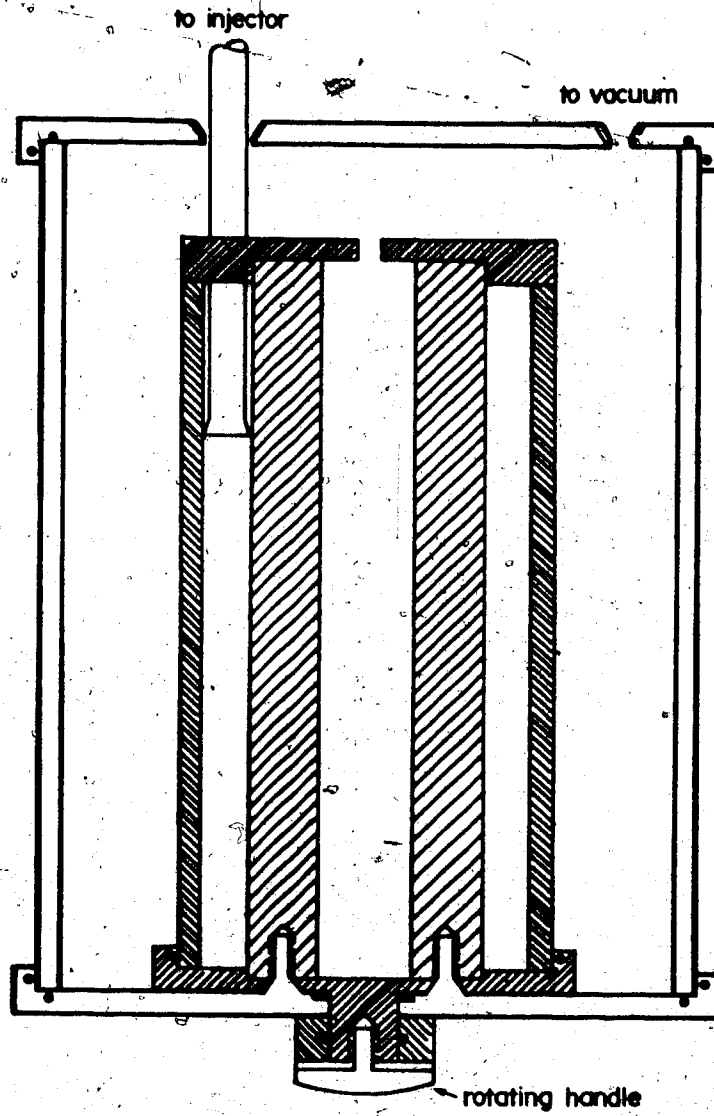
Mould for Forming Rubber Triaxial Membranes
